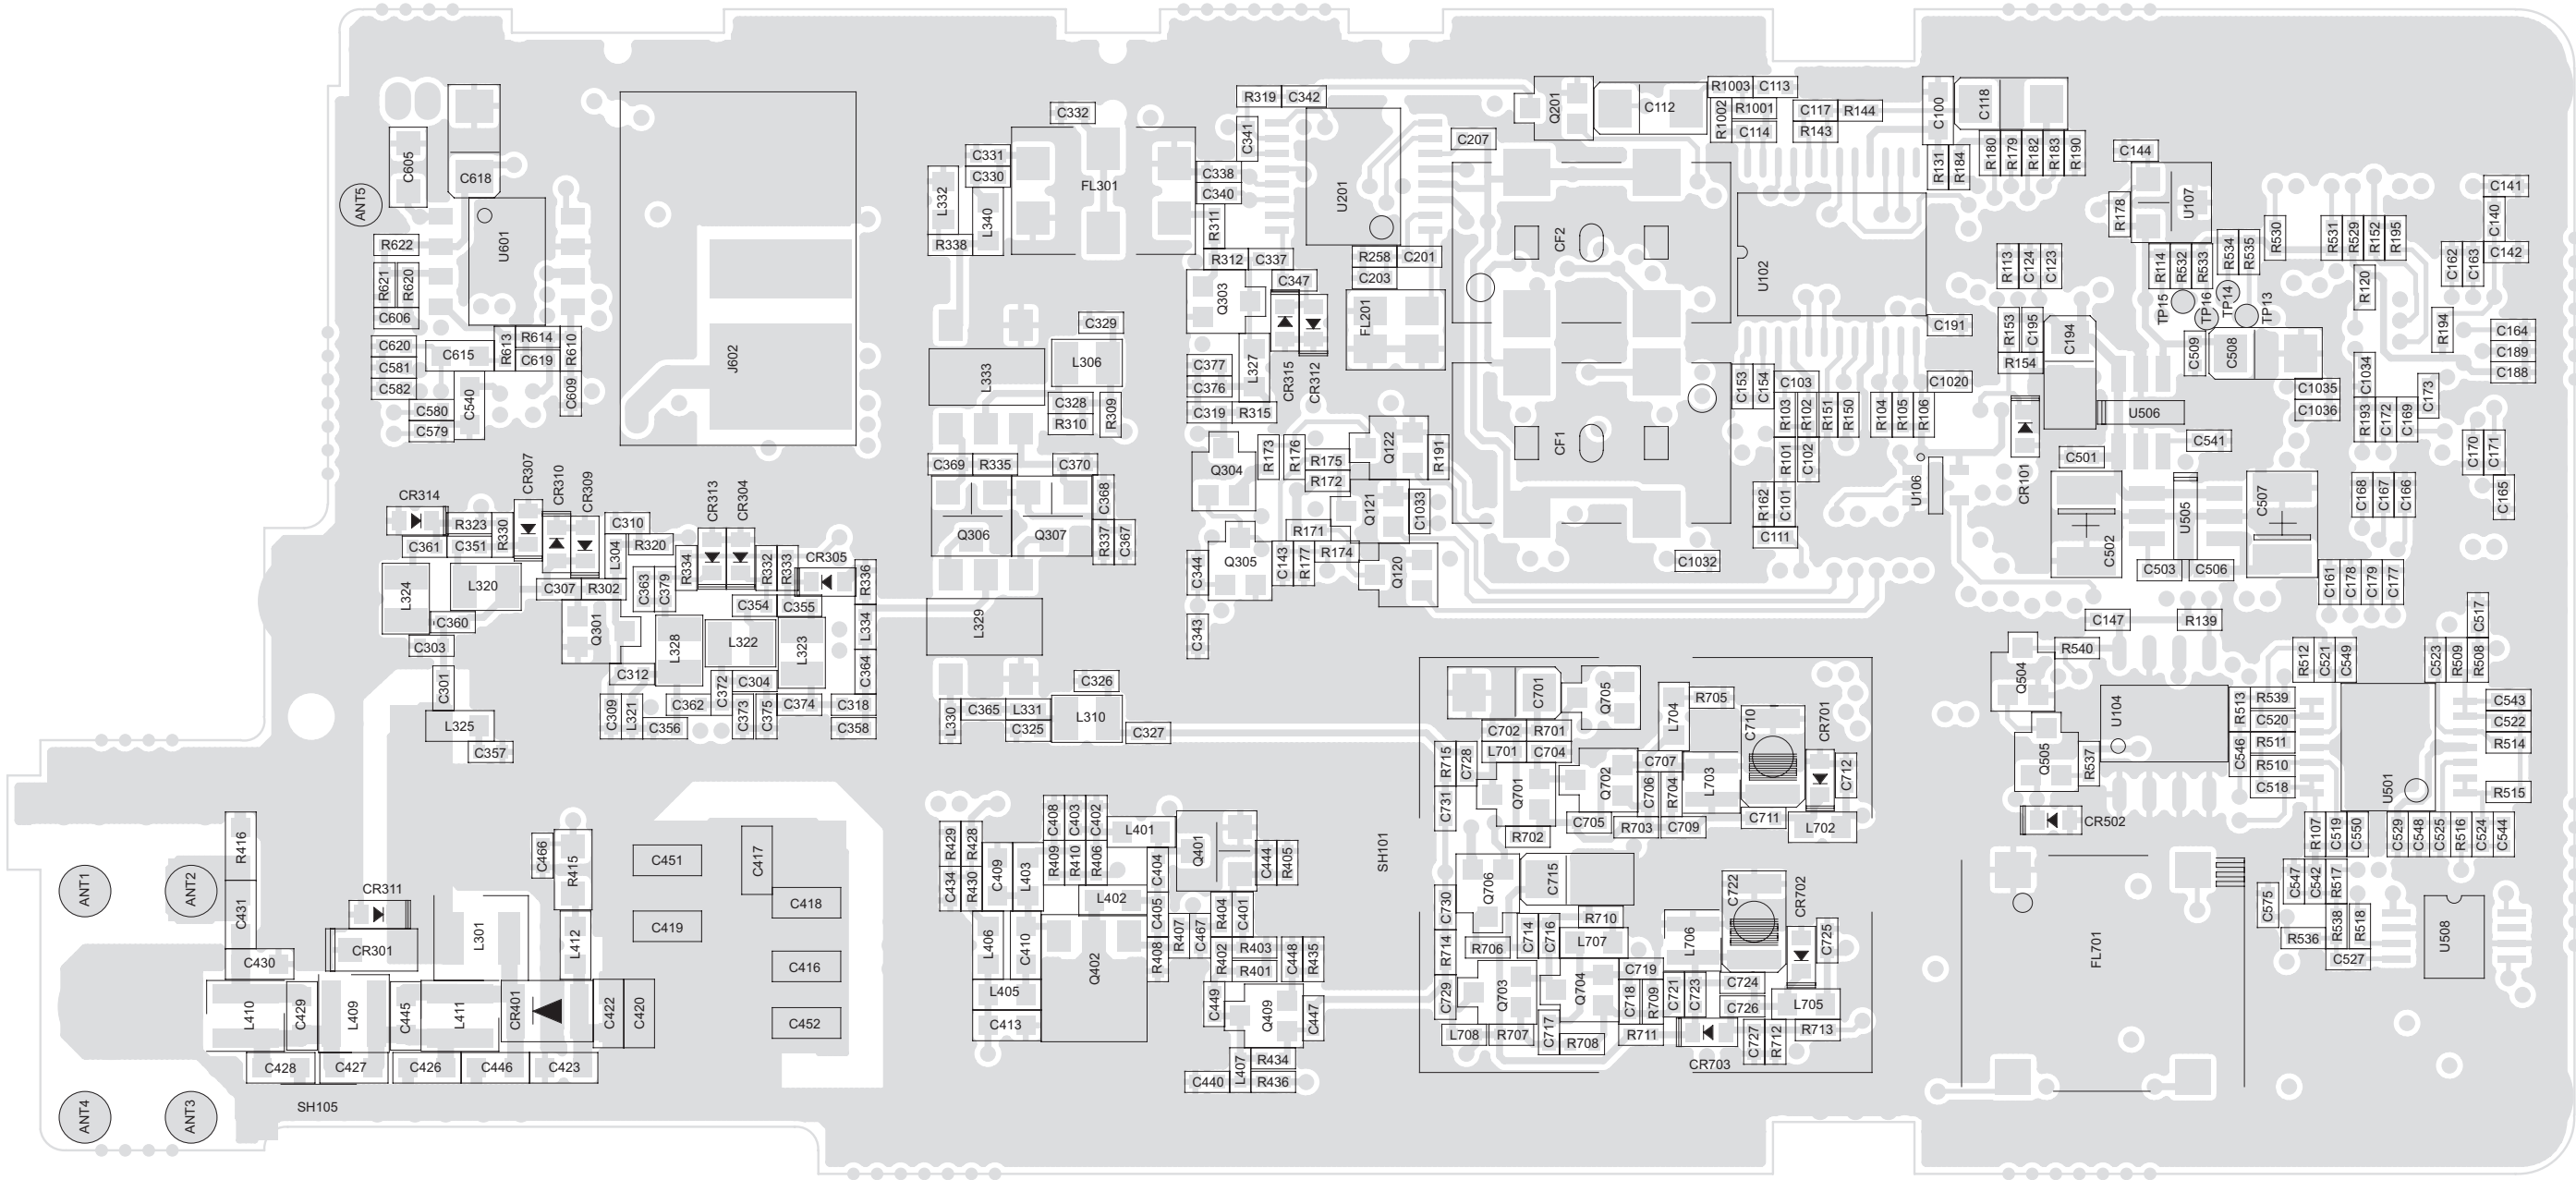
UHF2 (435–480 MHz) Mainboard Bottom Side: PCB No. E11-000995-00
